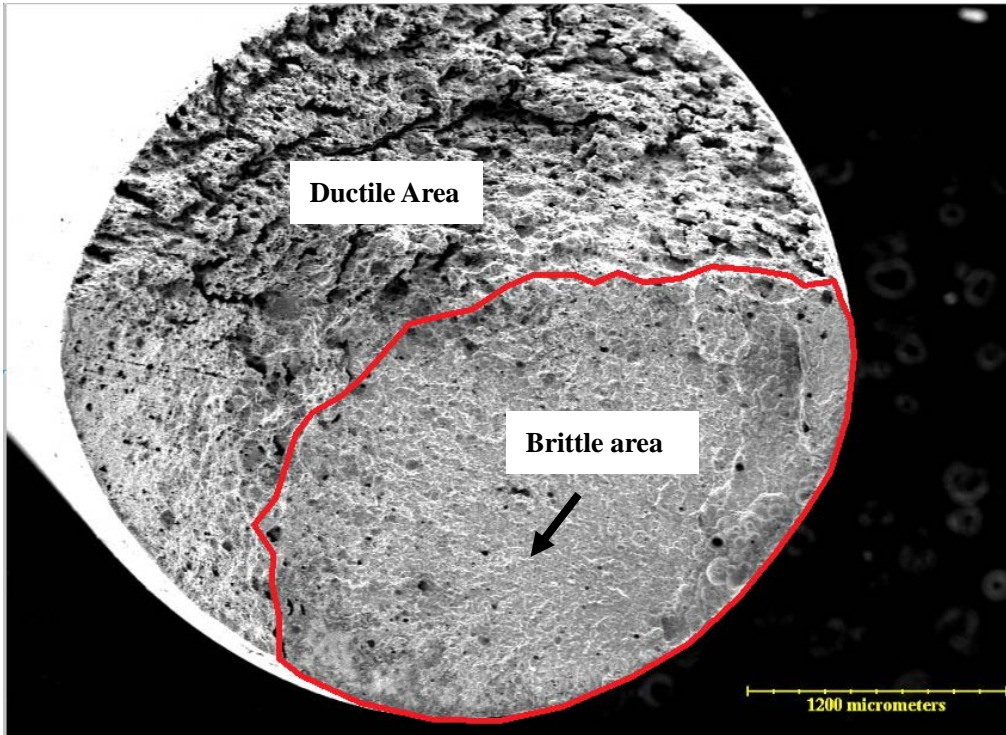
Measurement of brittle area on fracture surface (ERW L80-B).
